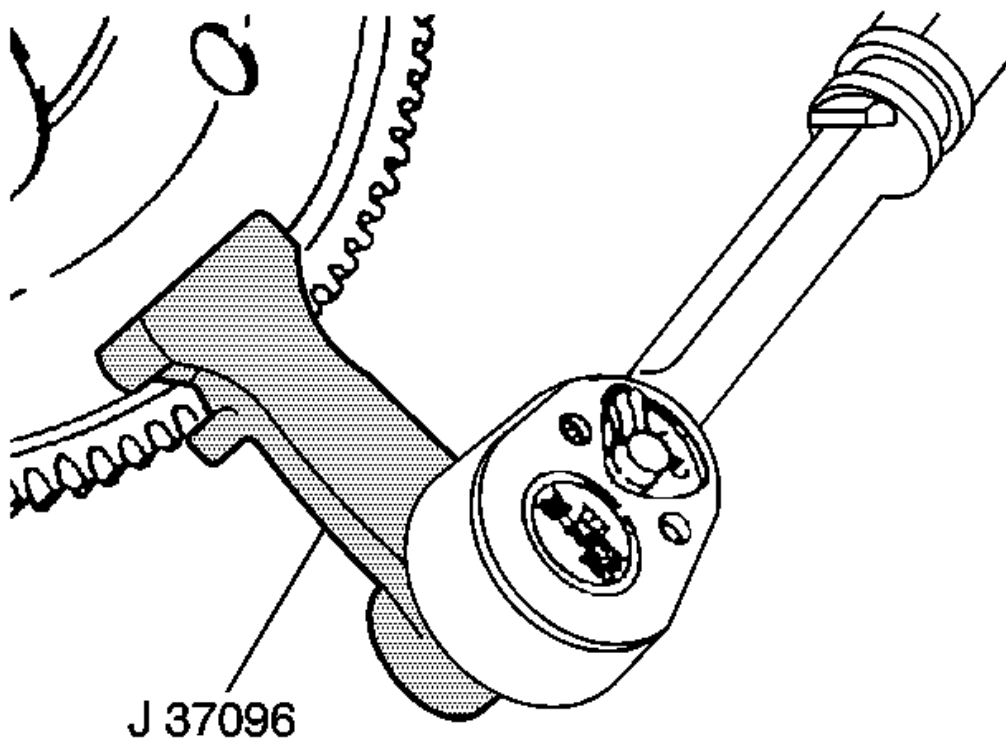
View Of Flywheel & Flywheel Holder (J 37096)
